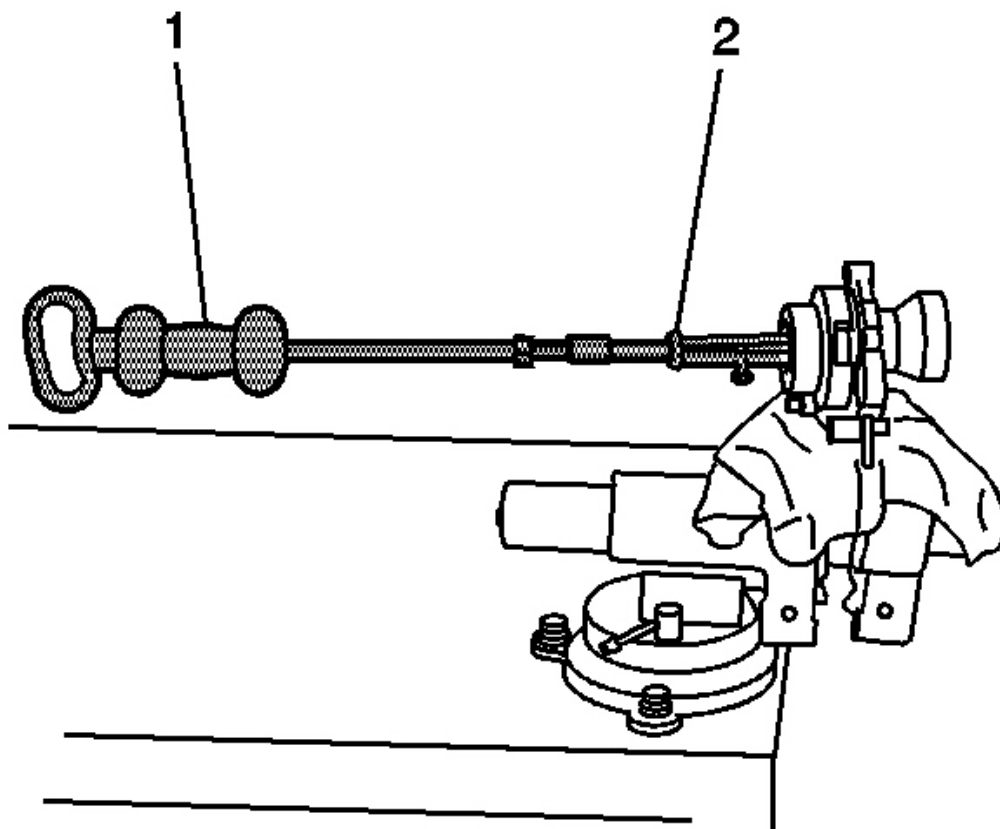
Bushing, Bearing Remover And Slide Hammer With Adapter Into Inboard, Oil Pan Side, Oil Seal
